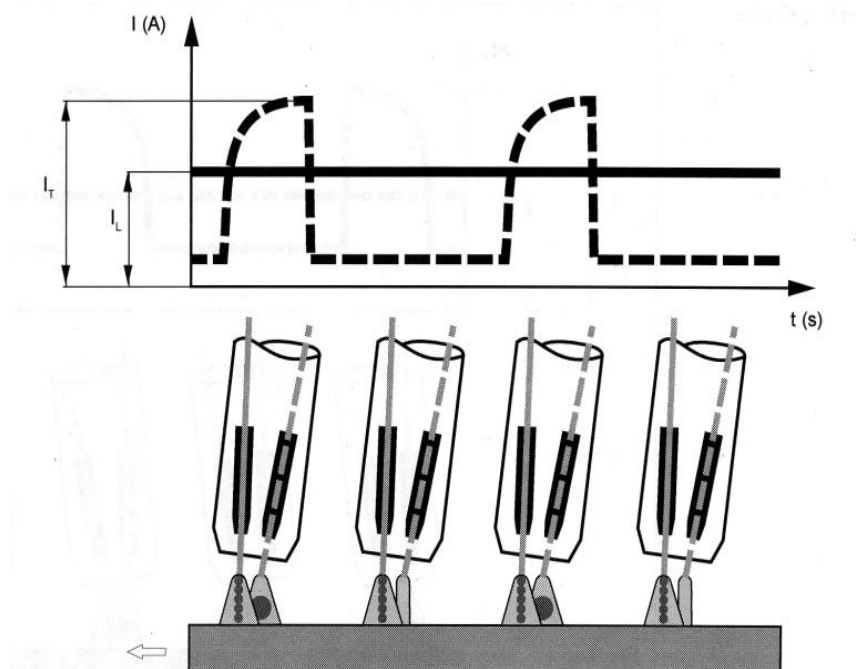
Tandem Spray and pulse welding schematic (reproduced from Fronius operators manual)
